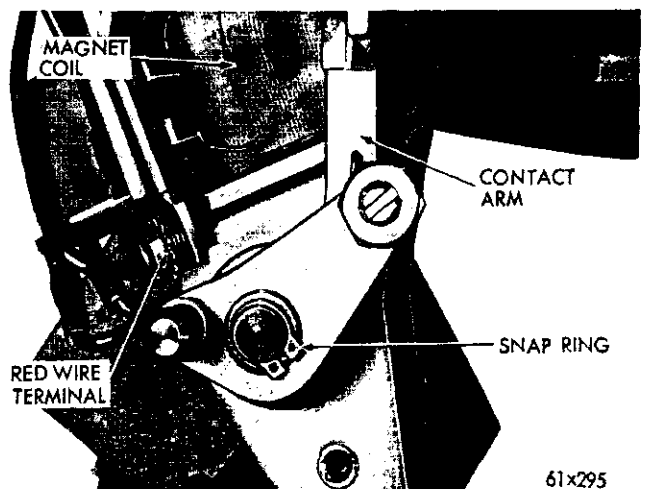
Snap Ring, Contact Arm, Pintle Shaft
